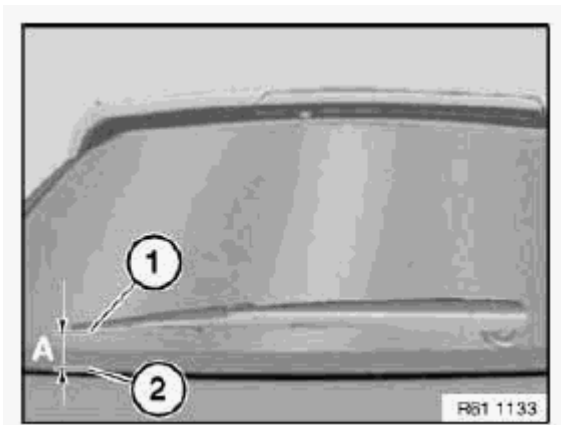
Identifying Measurement Between Wiper Blade And Rear Window Edge
